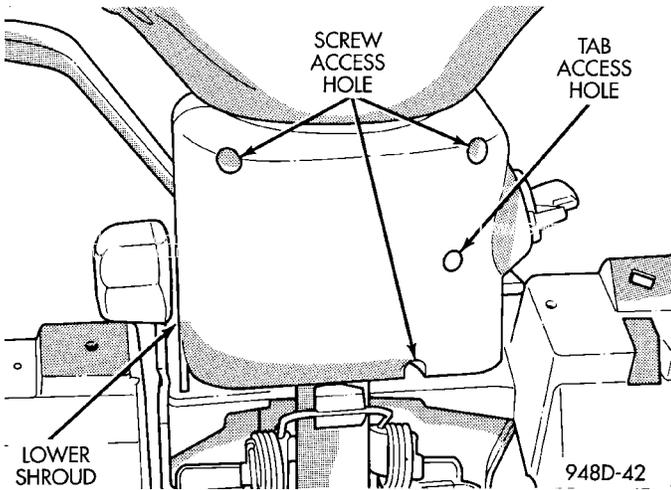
Key Lock Cylinder Access Hole In Steering Column Shrouds
